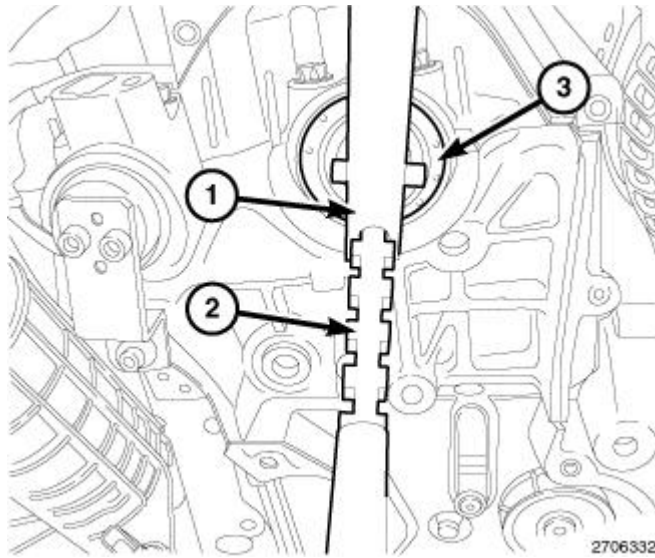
Seal Remover Handle, Seal Remover & Intake Camshaft Oil Seal
